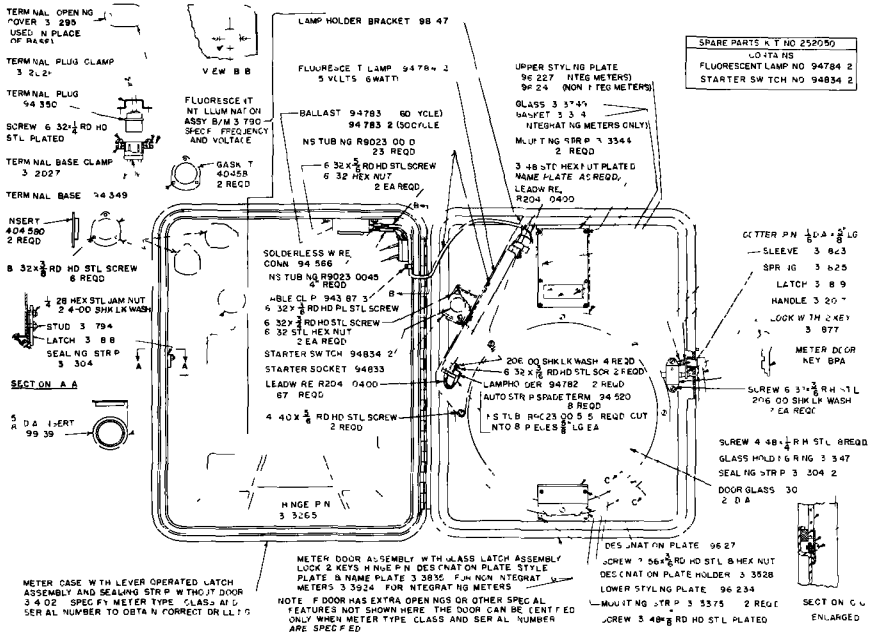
Parts Drawing G99-5, Rectangular Case Assembly
